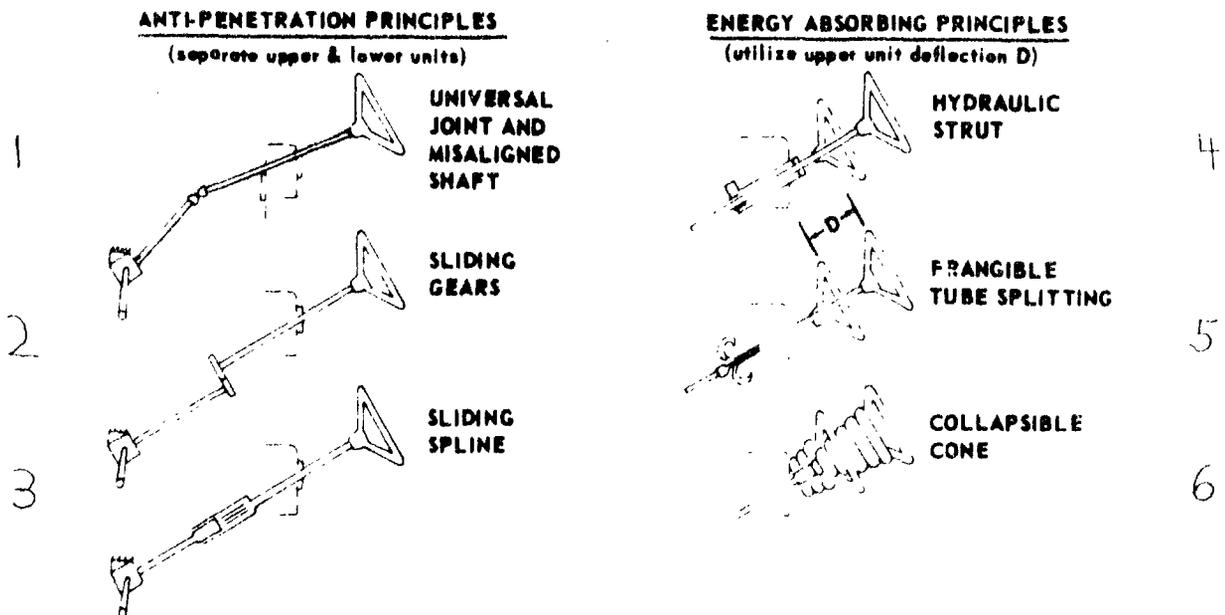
In 1964, R.A. Wolf suggested 6 concepts for a safer steering assembly. The concepts resemble: (1) the U-joints on recent Fiats and Volkswagens, (2) the forward mounted gearbox, (3) the customary engine compartment telescoping unit, (4) the ball or groove type tube, (5) the slotted jacket column and (6) the steering wheel EAD [75].
